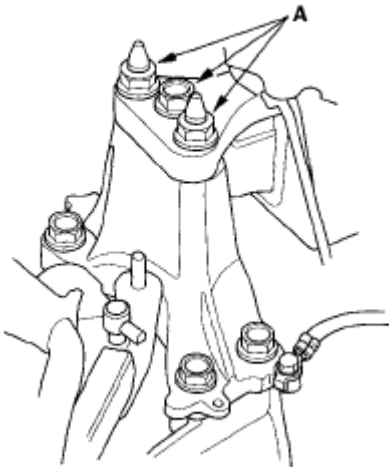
Identifying Transmission Mounting Bolt And Nuts - M/T
